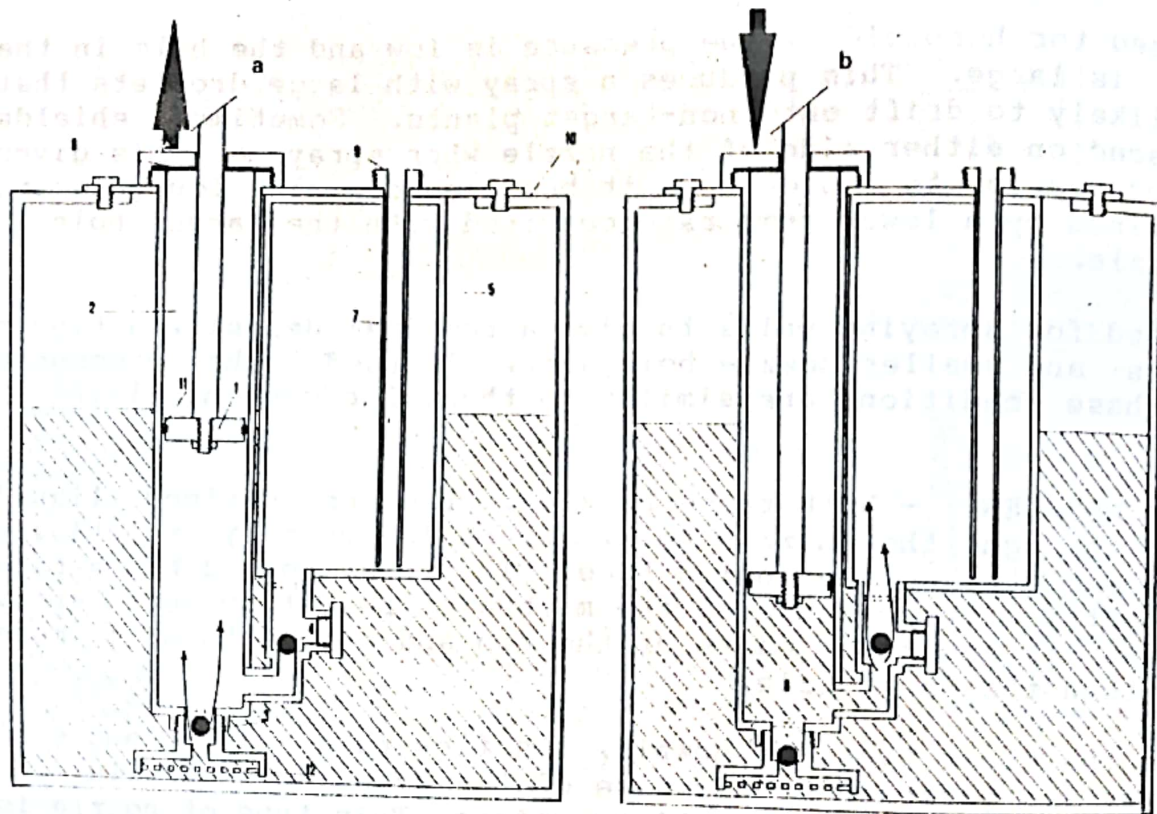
PUMP AND PRESSURE VESSEL OF A PISTON PUMP LEVER-OPERATED SPRAYER. 1=PISTON; 2=CYLINDER CHAMBER; 3=INLET BALL VALVE; 4=OUTLET BALL VALVE; 5=PRESSURE VESSEL; 6=PESTICIDE; 7=DIP TUBE; 8=SEALING WASHER; 9=HOSE ATTACHMENT; 10=TANK WALL; 11=PISTON O-RING; 12=STRAINER. (From Non-motorised Hydraulic Energy Sprayers see reading list).
